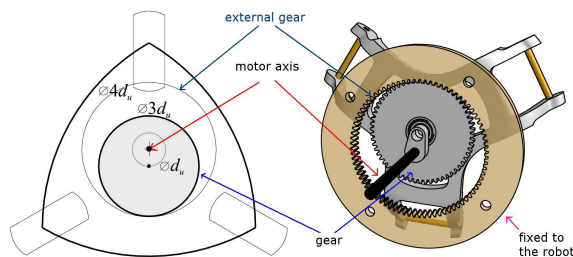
Gear wheels and their diameter. When rotating around the gear fixed to the robot, the center of the Reuleaux disc describes a circle of radius d_u .
